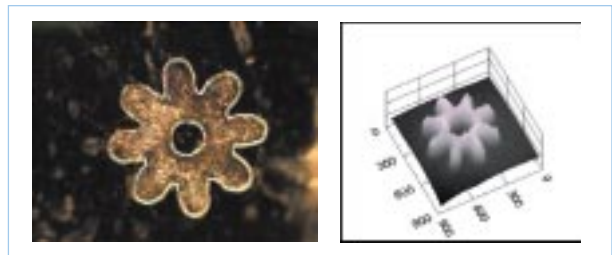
A gear manufactured by micro electrolytic machining technology (Diameter: 600 μ m)
